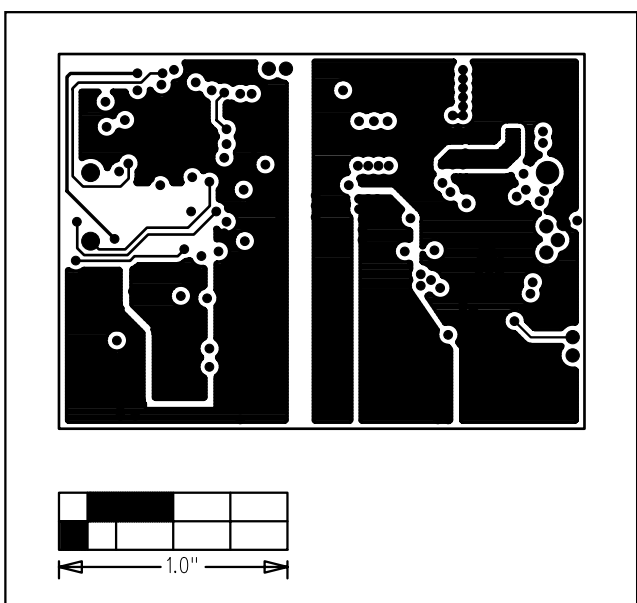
MAX5058 EV Kit PC Board Layout—Inner Layer, VCC Plane
